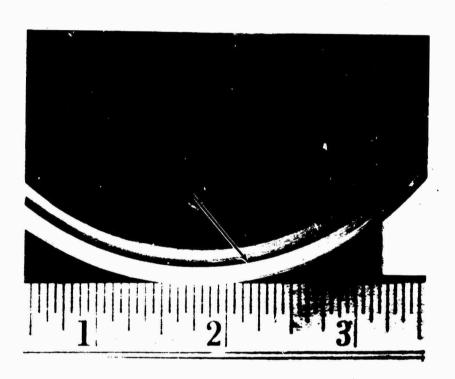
Wear on Face of Retainer (P/N 114D5063-1).
